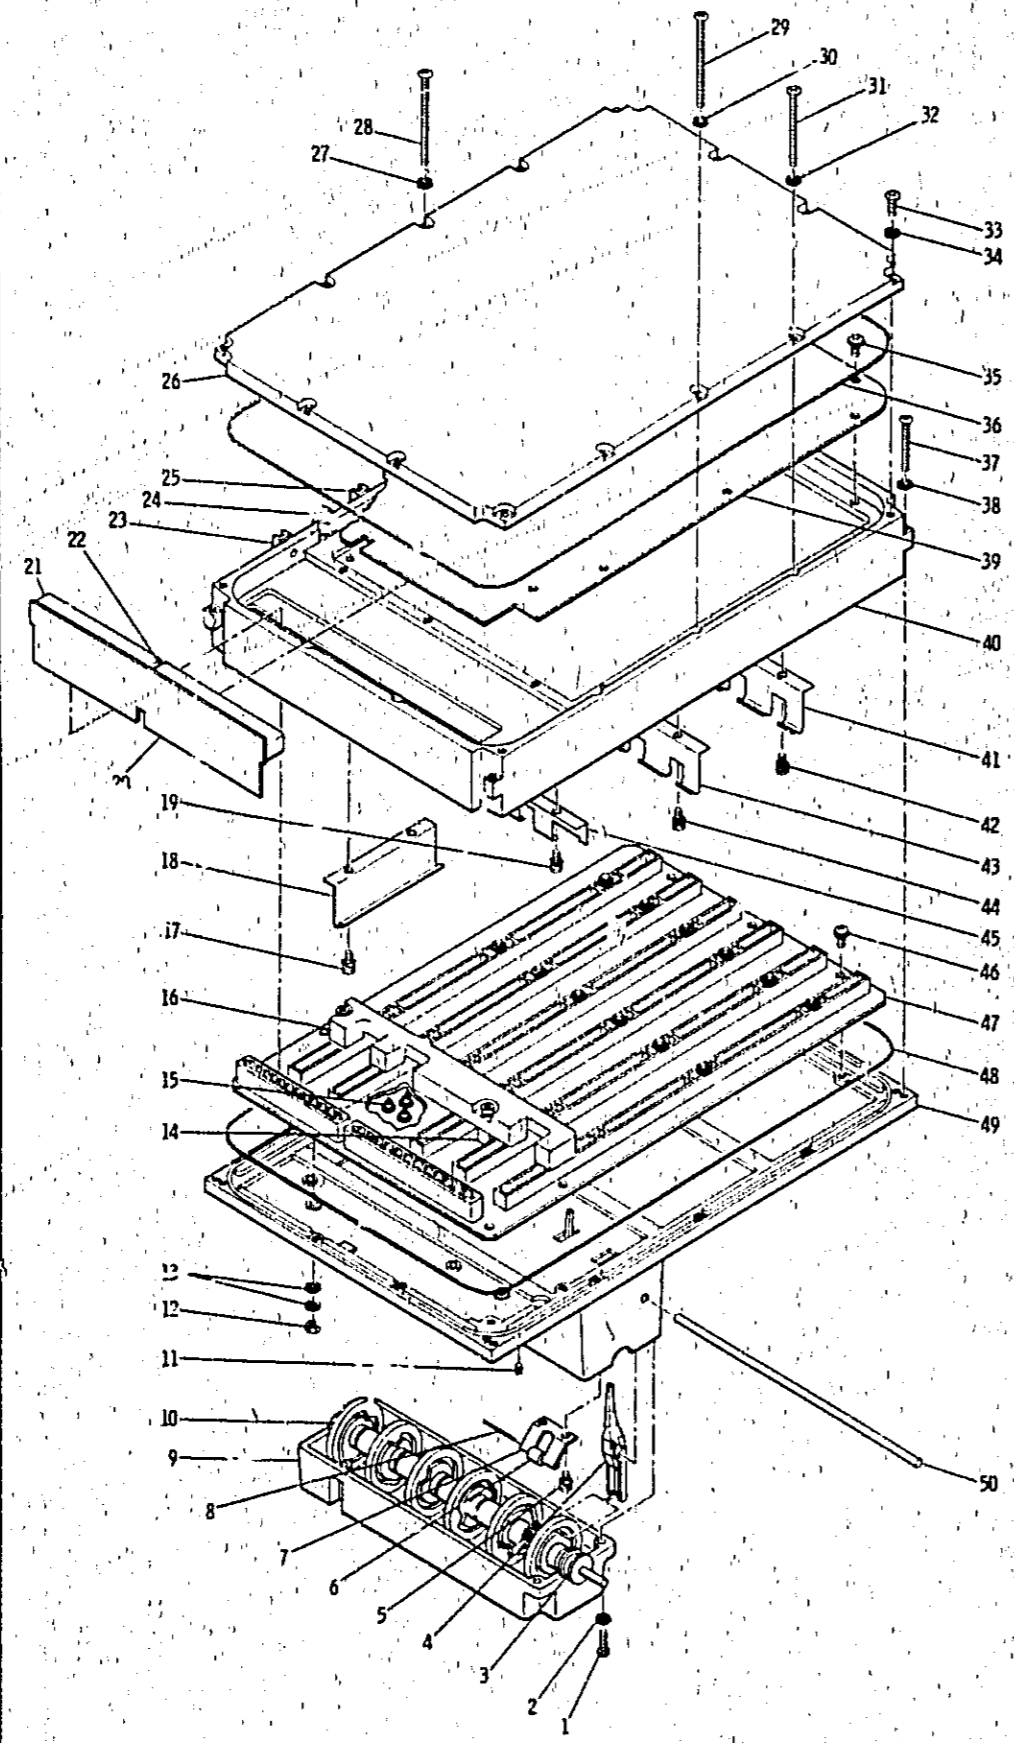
A10 Divider/Filter Assembly Illustrated Parts Breakdown
